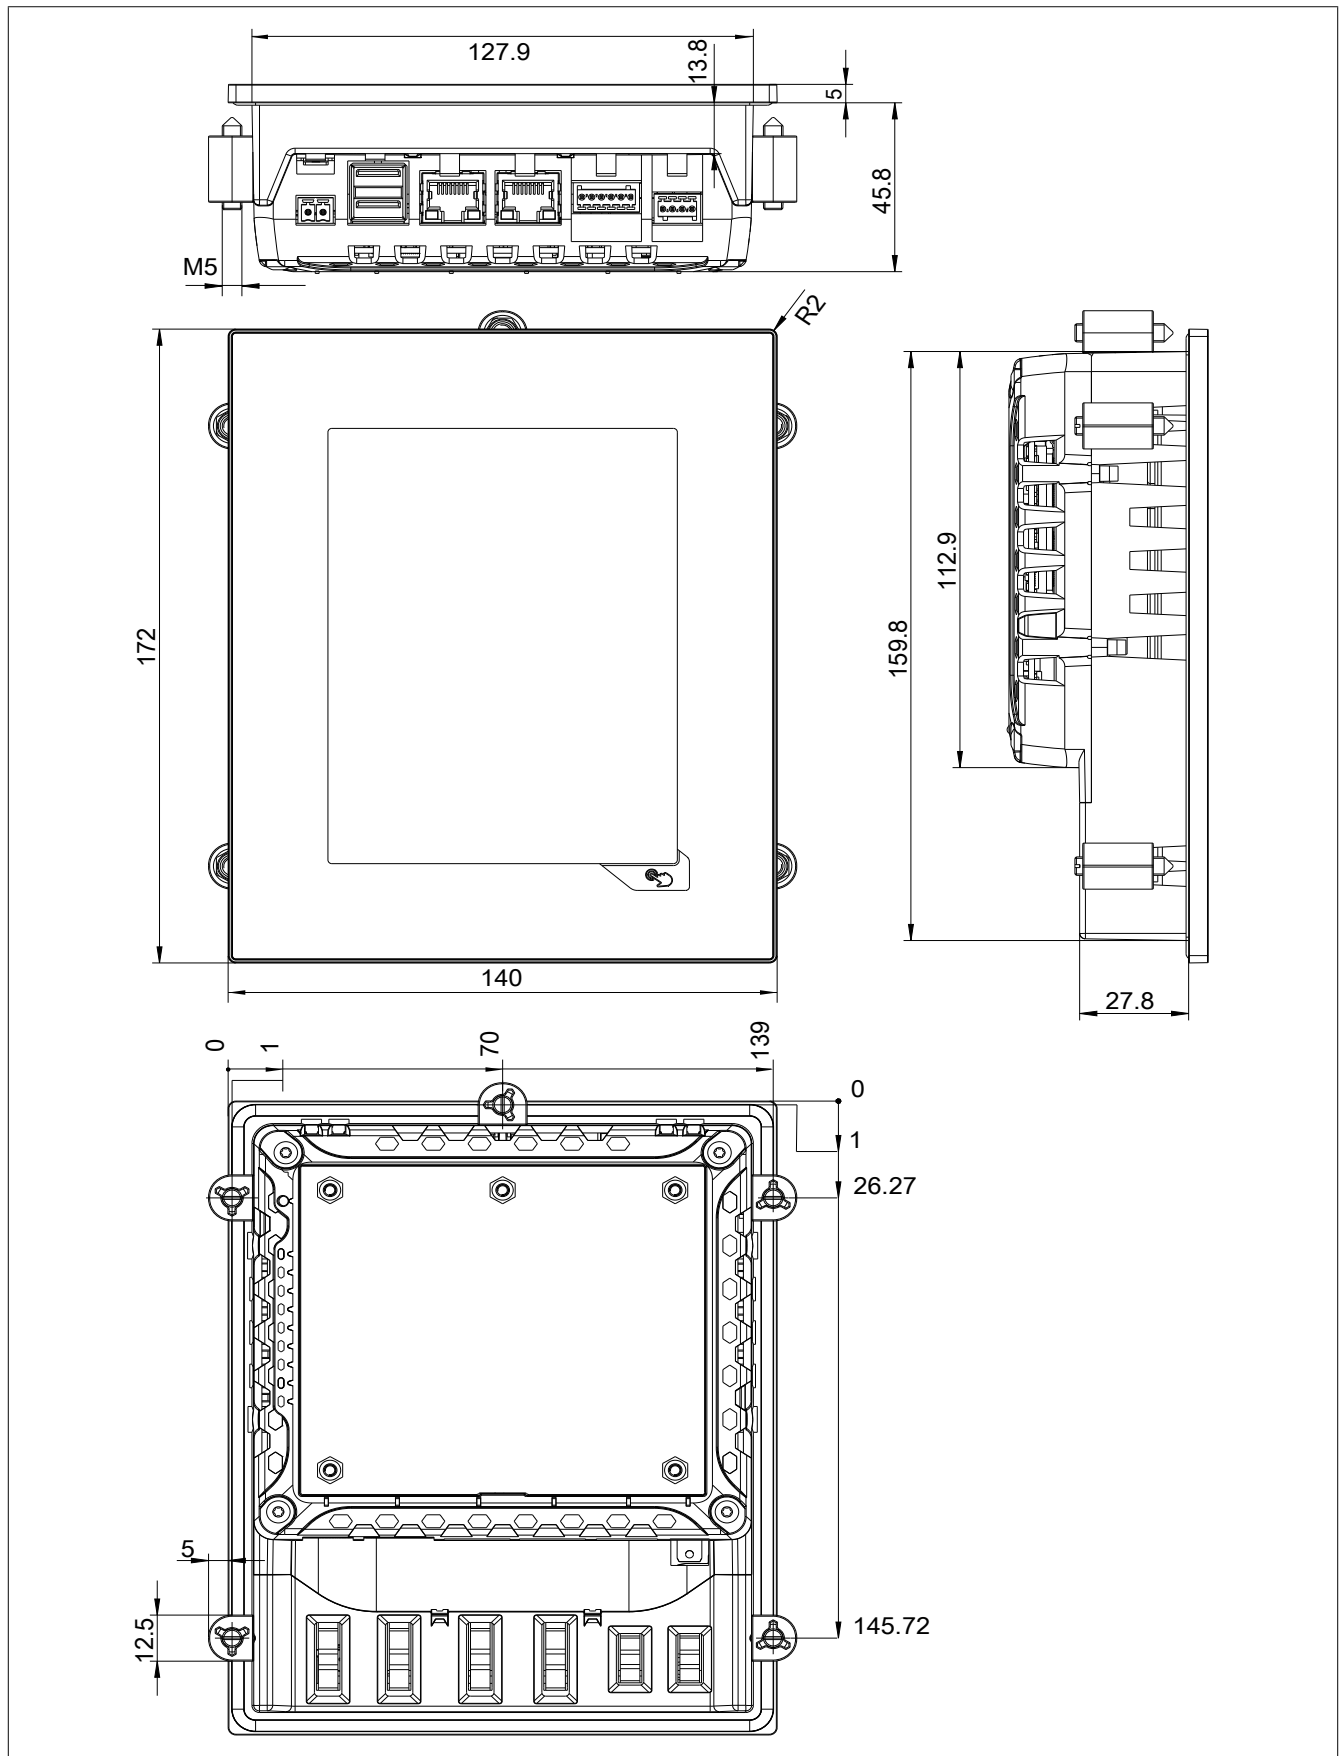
Dimensions - 4PPC70.057x-2xx - 4PPC70.057L
